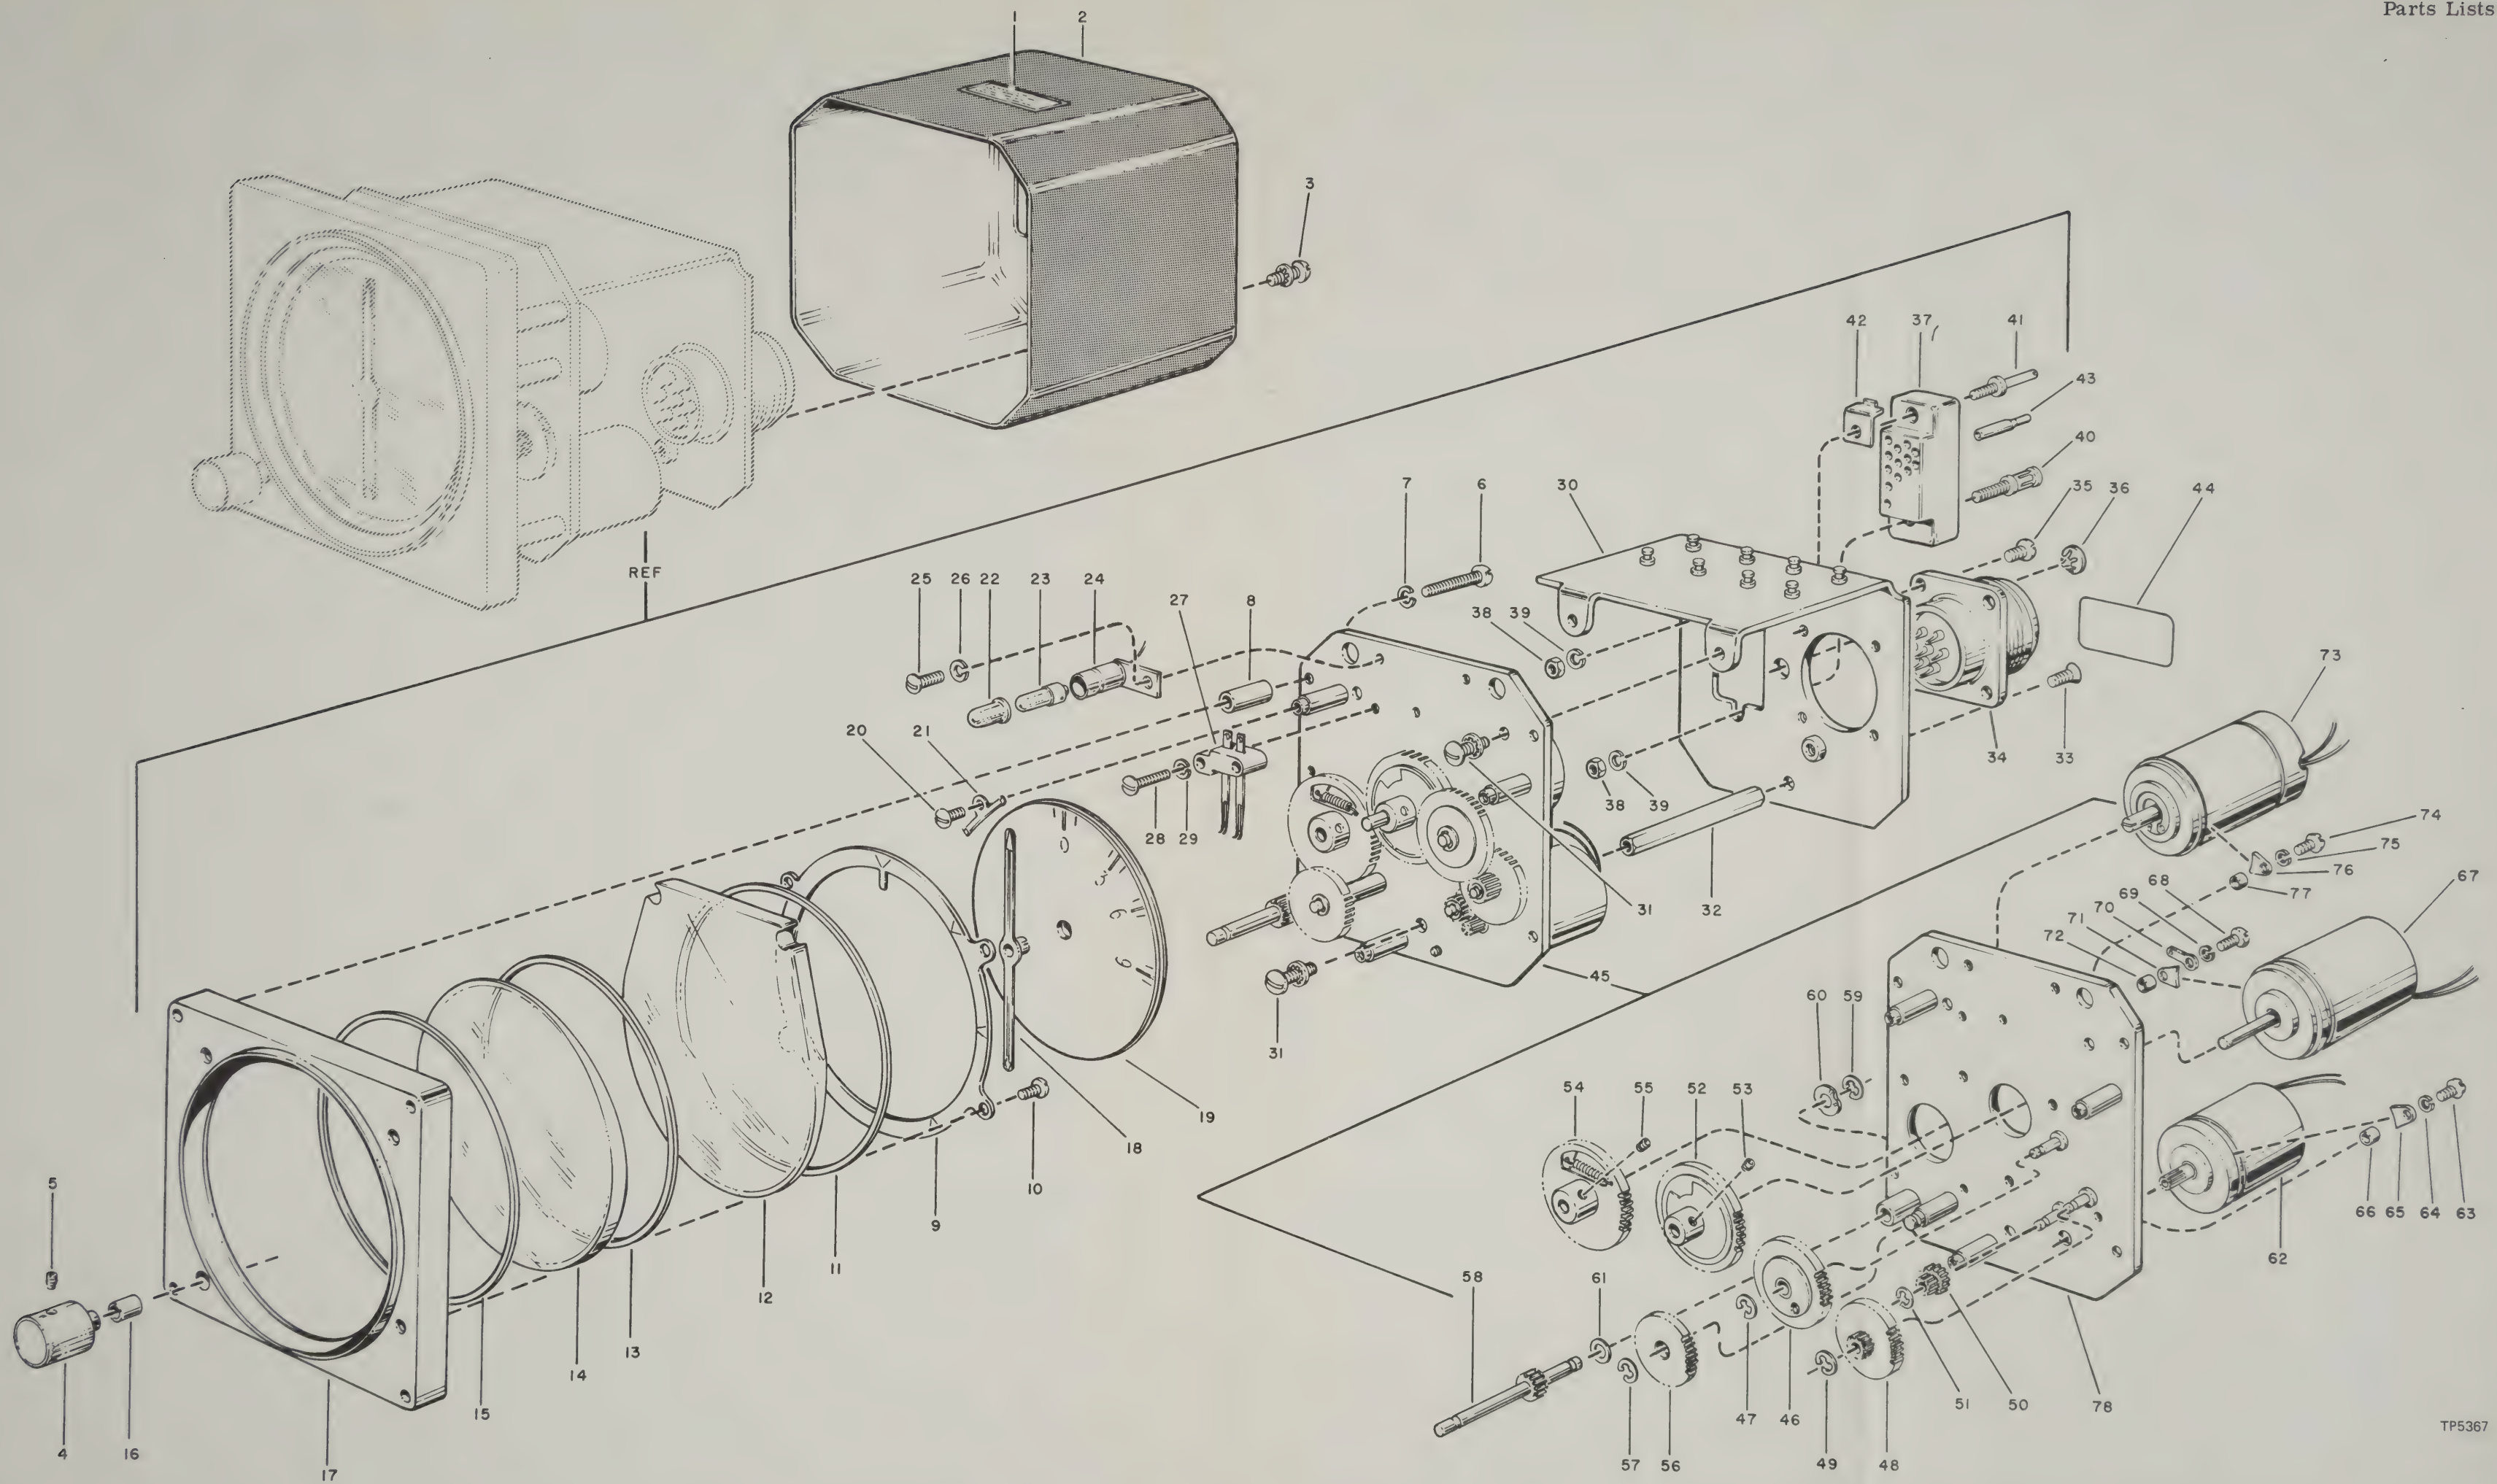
A. IN-346A and IN-346B Goniometer Indicators, Exploded View
